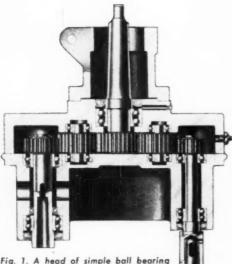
A head of simple ball bearing construction. This is a fixed head, which is usually gear driven.
